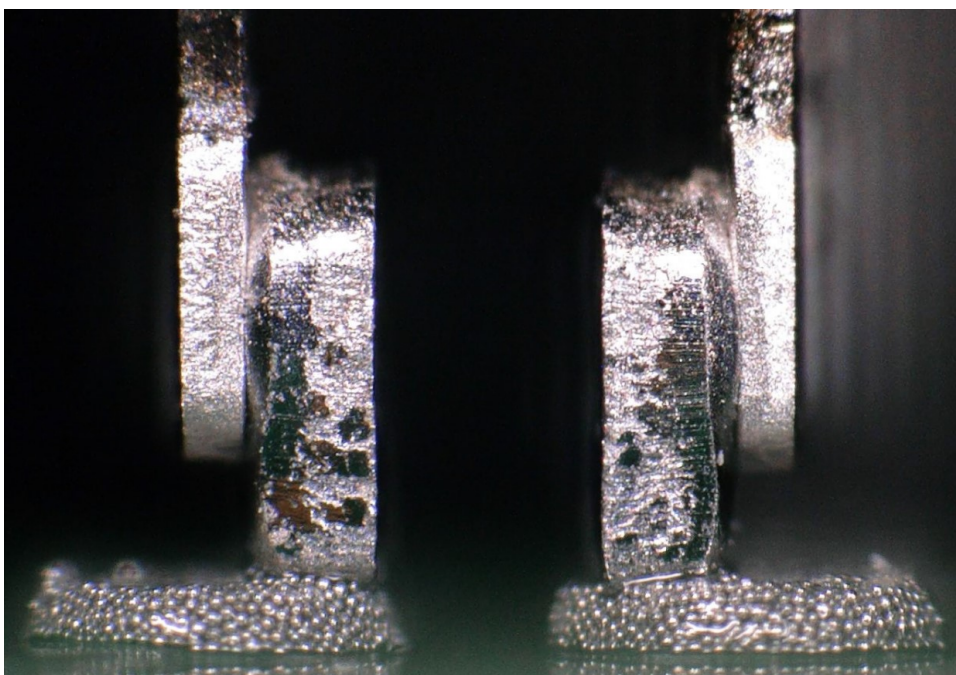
Solder charge location relative to solder print. Notice good contact between solder charges and solder paste.
